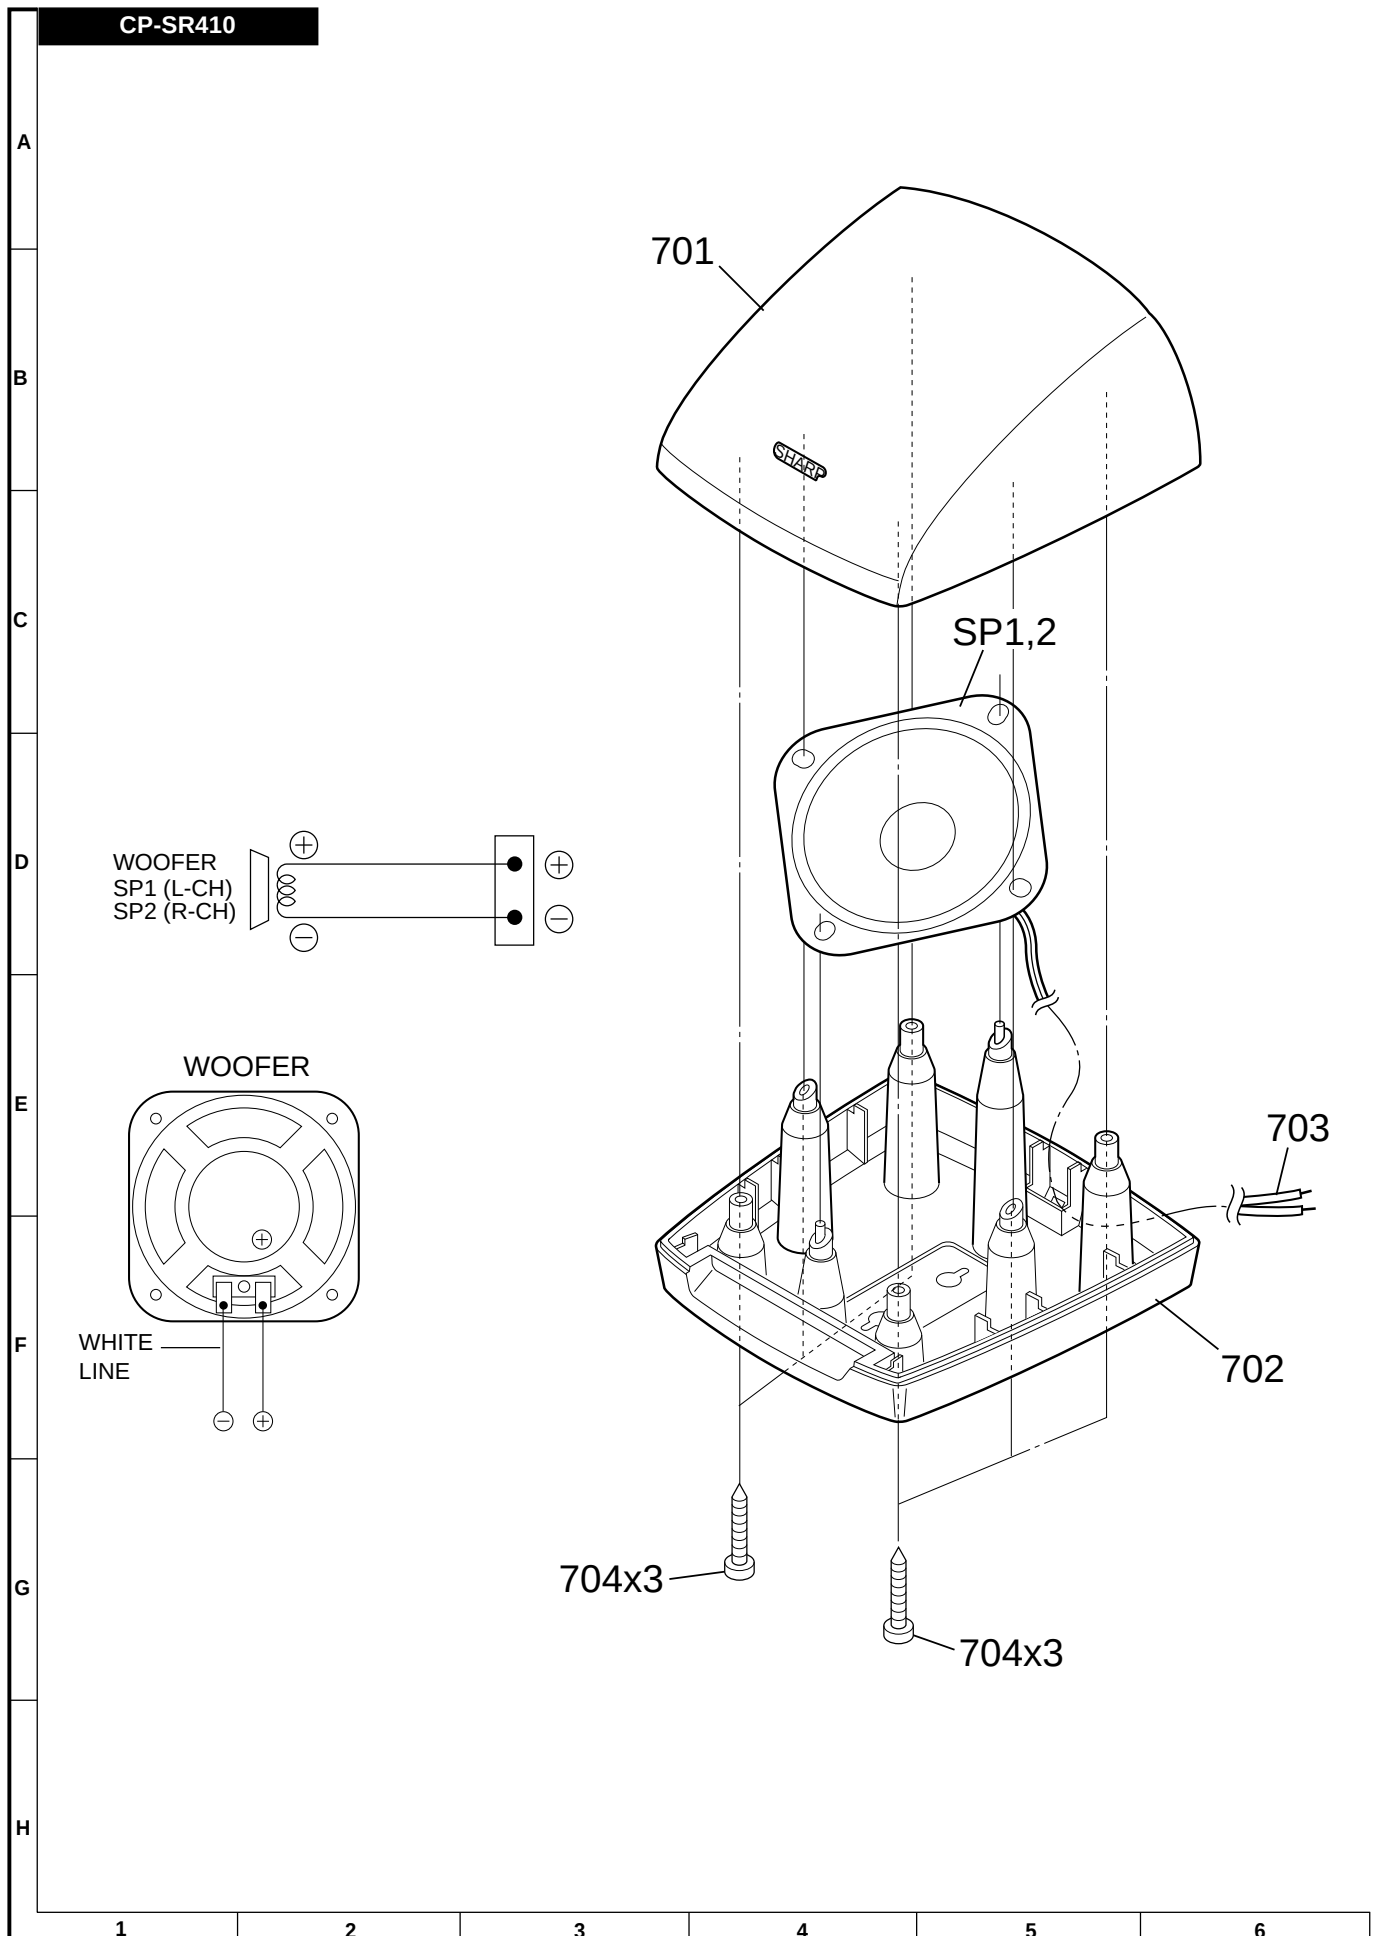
SPEAKER EXPLODED VIEW (2/3)
